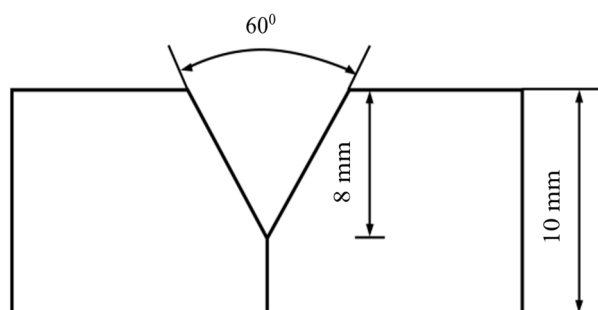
Groove type of 10 mm 7A52 aluminum alloy MIG welding
